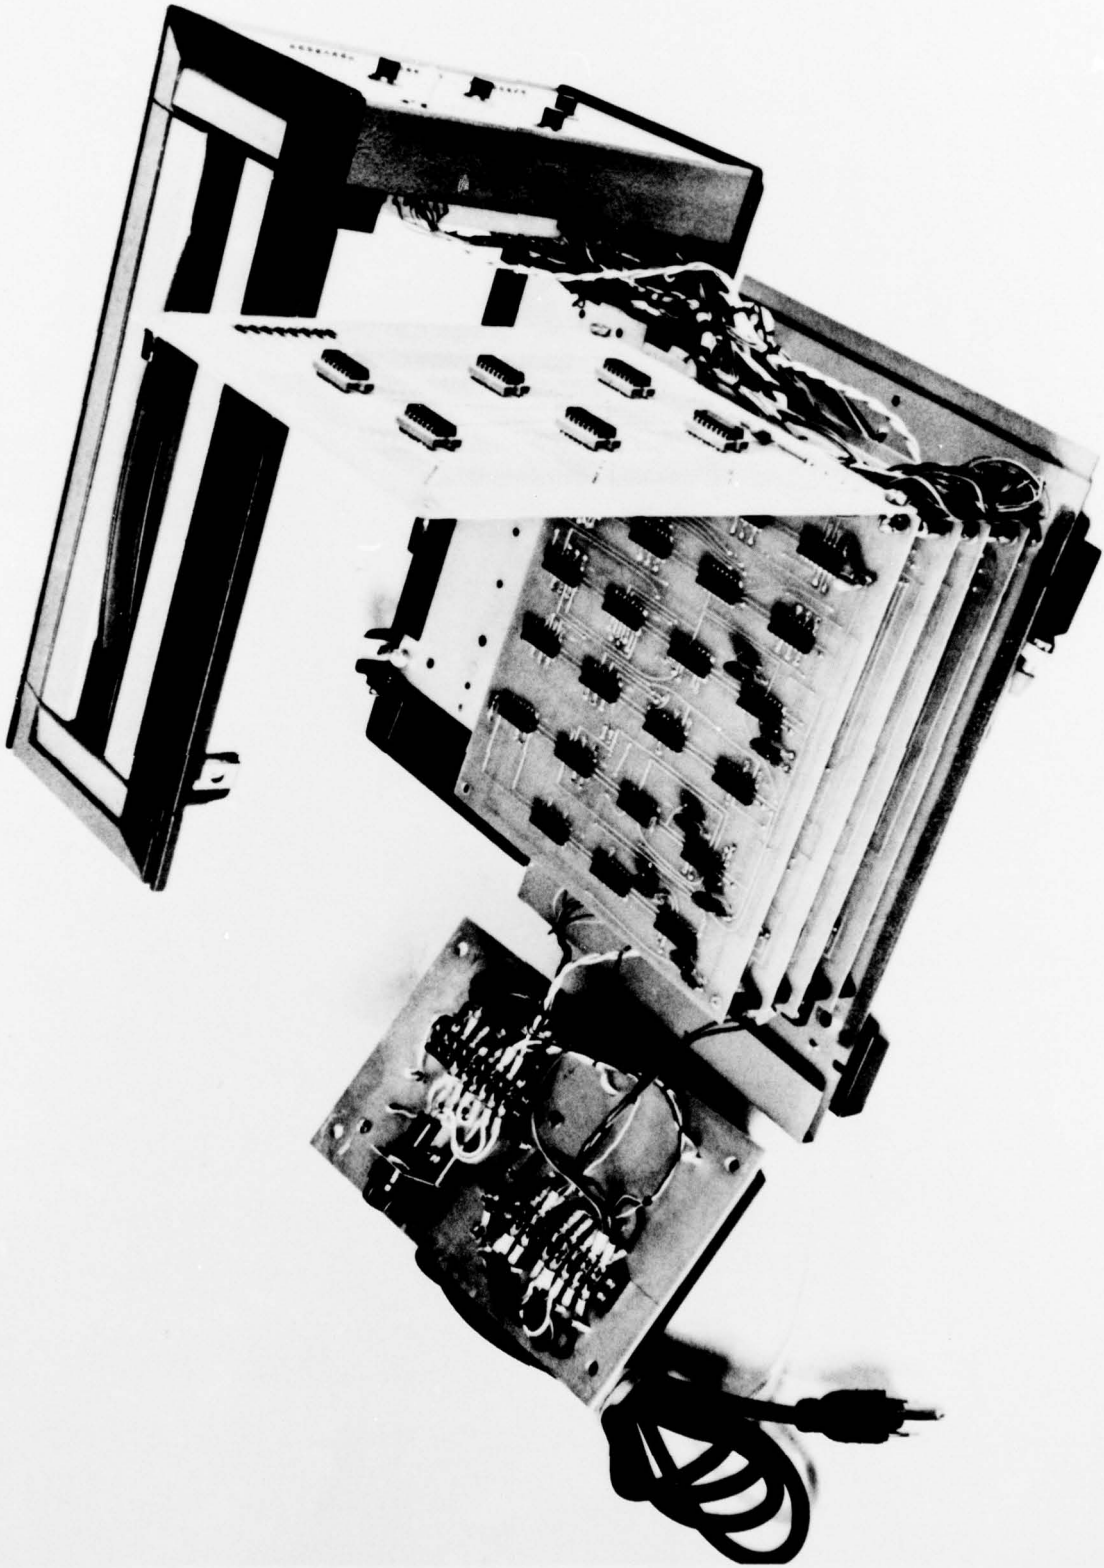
SSRD ASSEMBLY, VIEW 1
